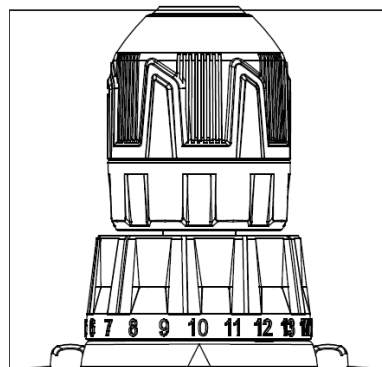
Adjusting the slip clutch (cordless screwdriver)
